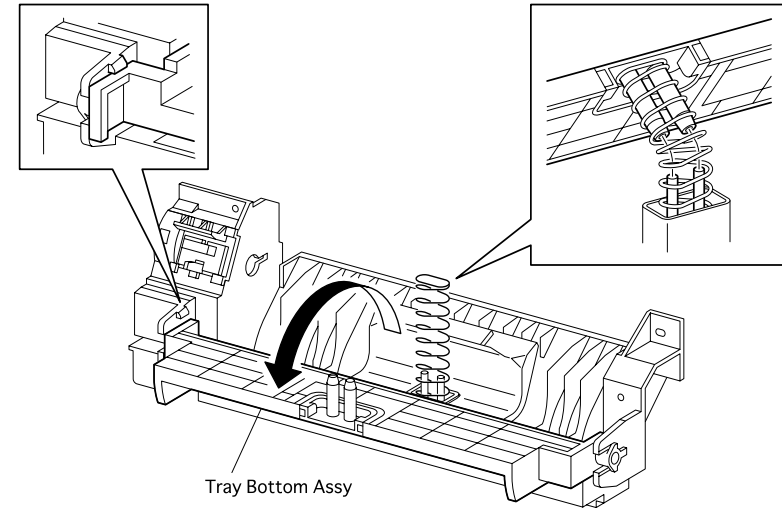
Removal of Sensor Photo: Paper Set (1)
